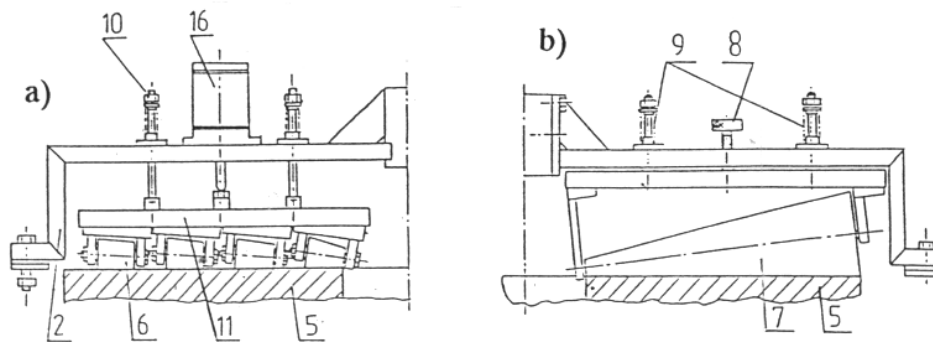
Conical roller assembly for lapping tool charging (a) and the position of the abrasive micrograin distributing rubber roller (b)
